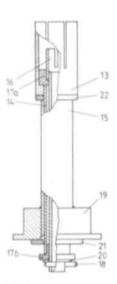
Cathode assembly for the YD 1060 6 cm power amplifier
